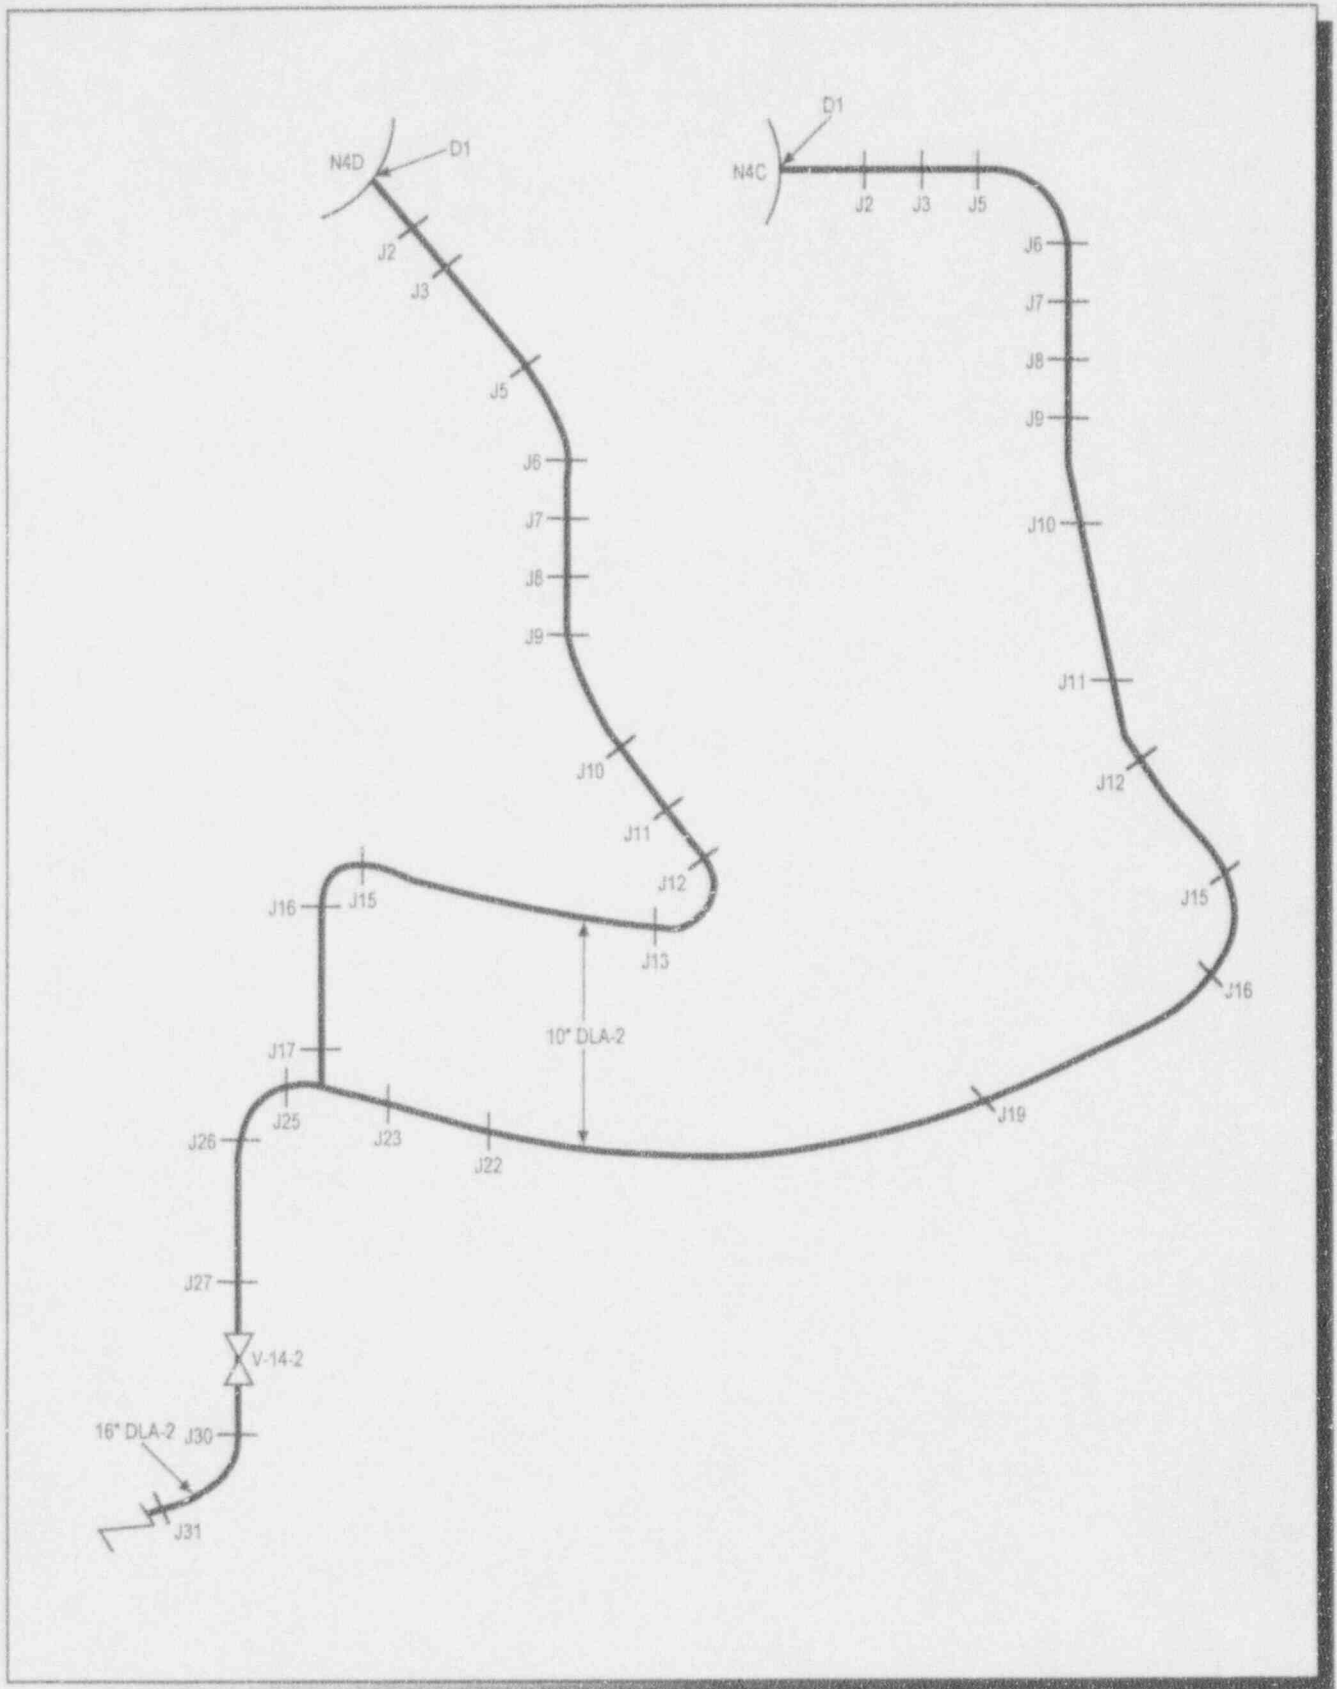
Isometric Drawing of Welds in Feedwater Loops C & D
